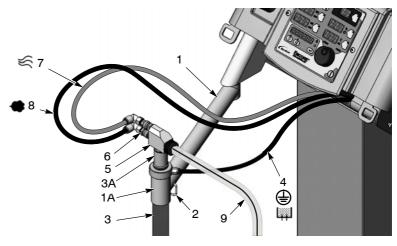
VBF System – Pickup Tube and Pump Installation
